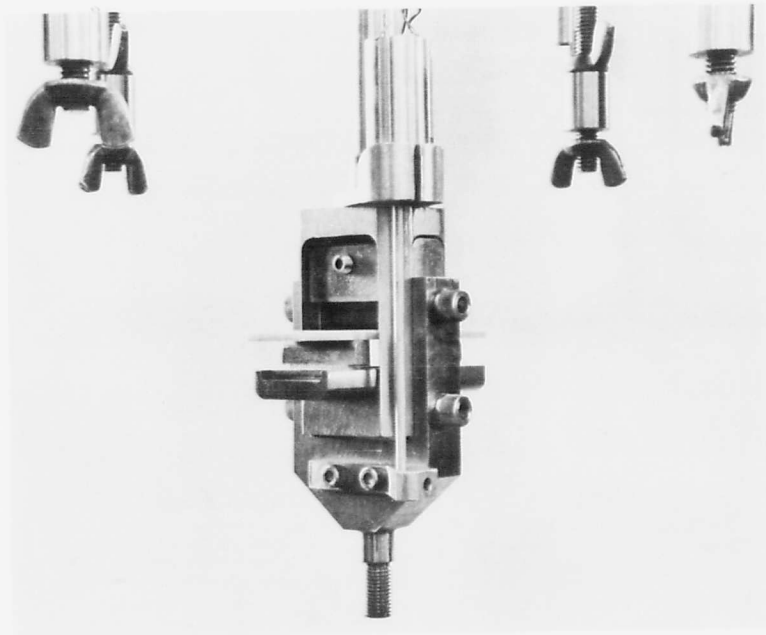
A Flexure Test Specimen Installed in the Test Fixture. The LVDT Type Extensometer is Mounted on the Upper Portion of the Fixture
